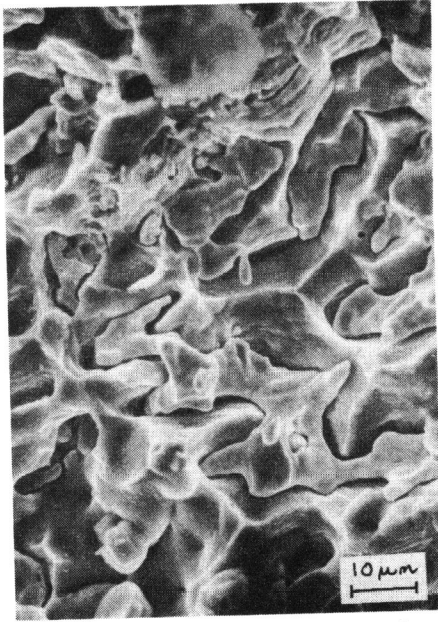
Al18Sn1Cu fracture surface, Fig.4 Al10Sn1Cu fracture surface
